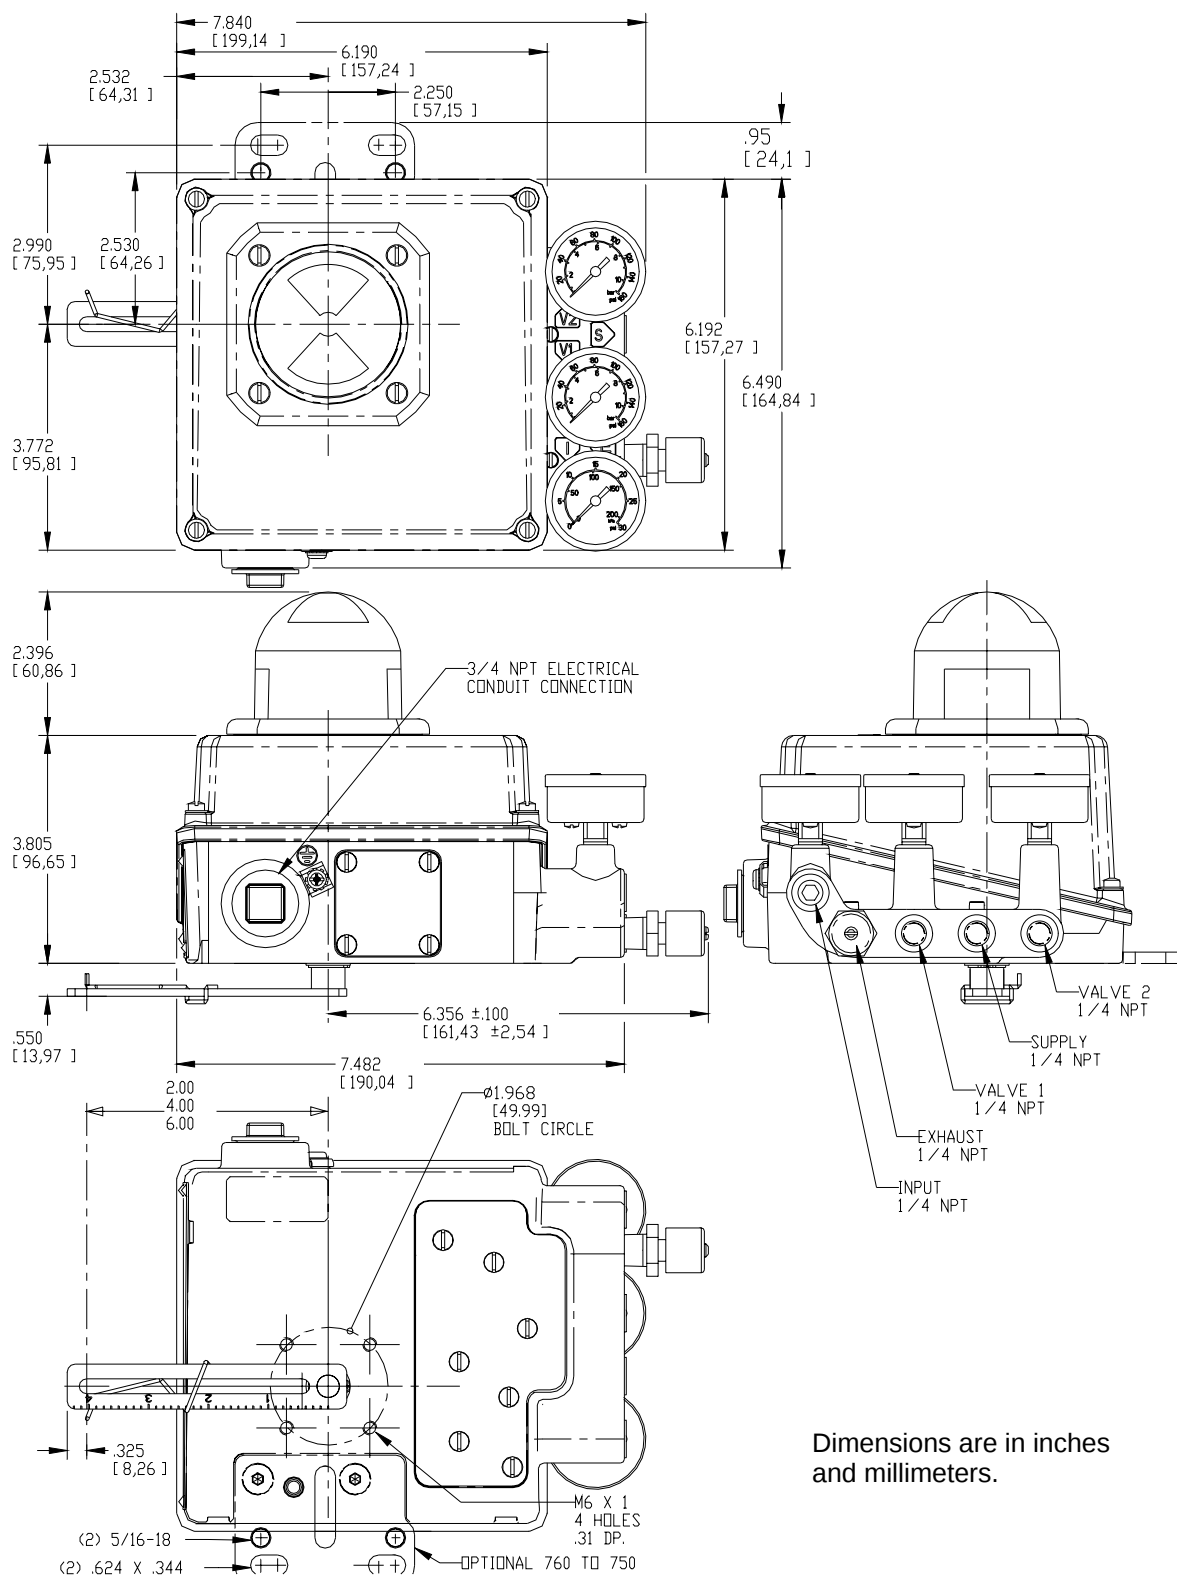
Series 760 Dimensions (Optional Beacon and Gauges Shown)
